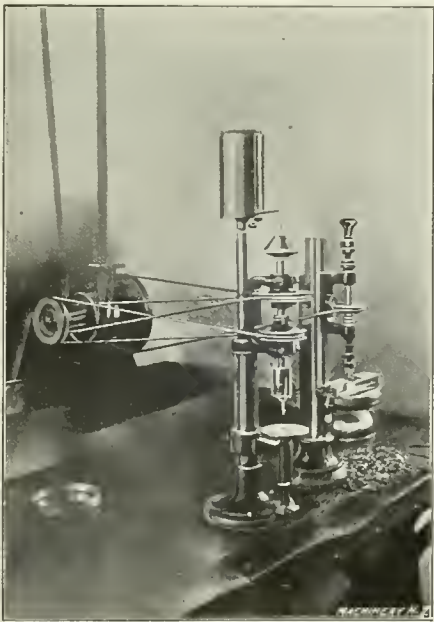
Tapping Machine and Drill Press for Counterboring Eccentric
